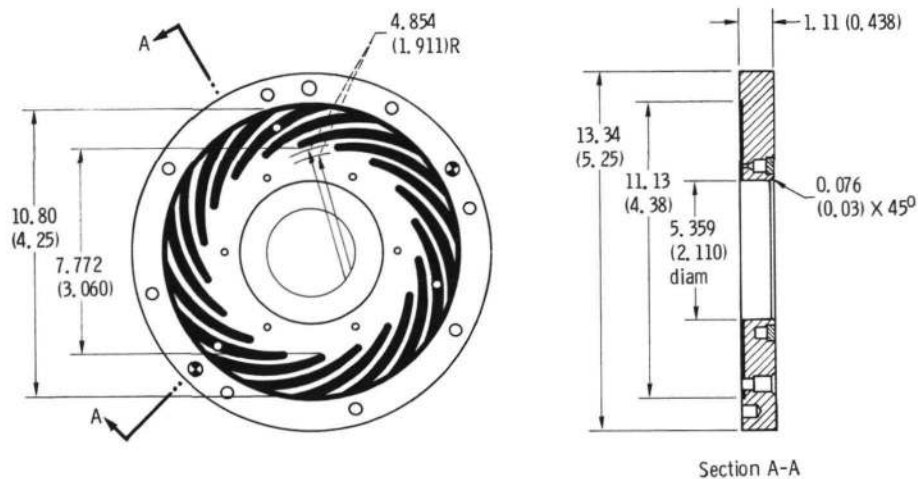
Thrust stator. (Dimensions are in cm (in.))
